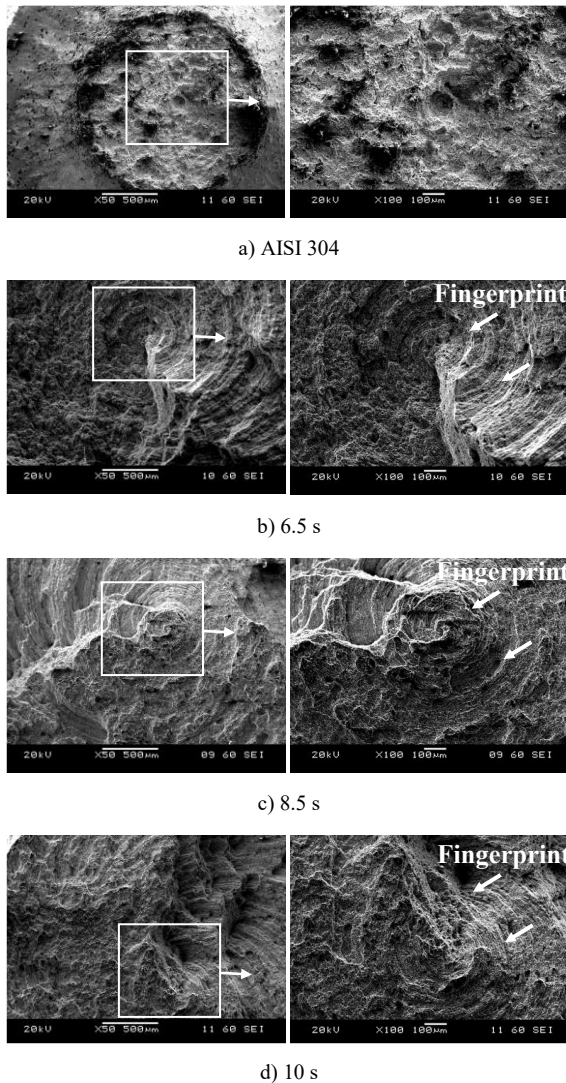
Fracture surface of tensile test specimens for different magnifications, for 6.5, 8.5 and 10 s with regard to AISI 304
